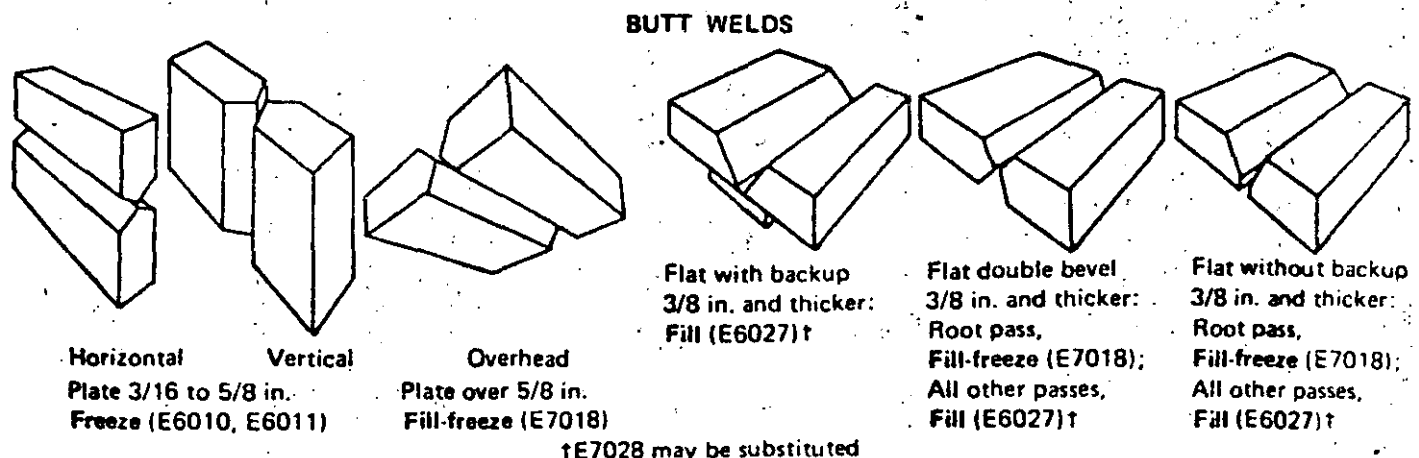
Guide to selection of electrodes for butt welds.
